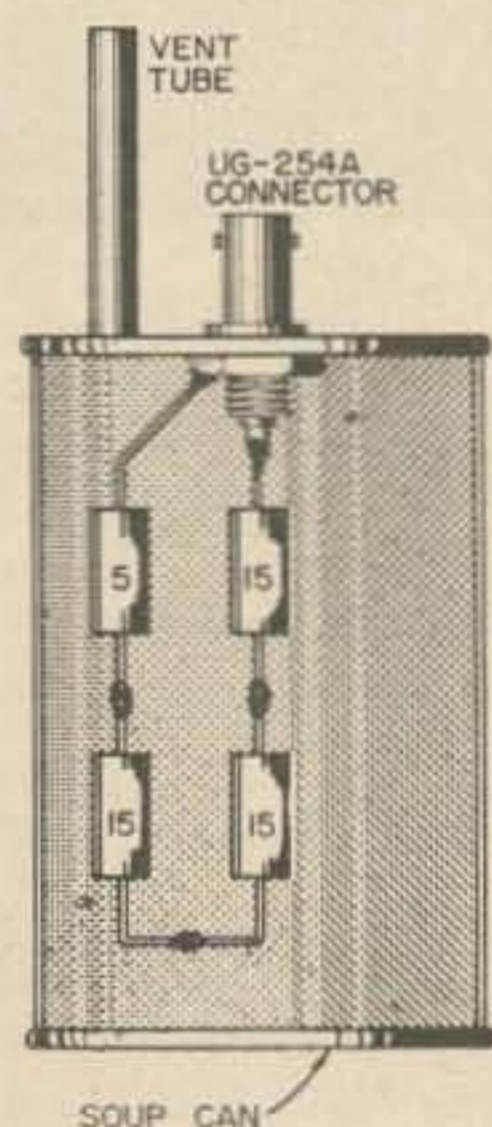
Construction of the Minican. Main parts are a soup can, coax connector and resistors.
